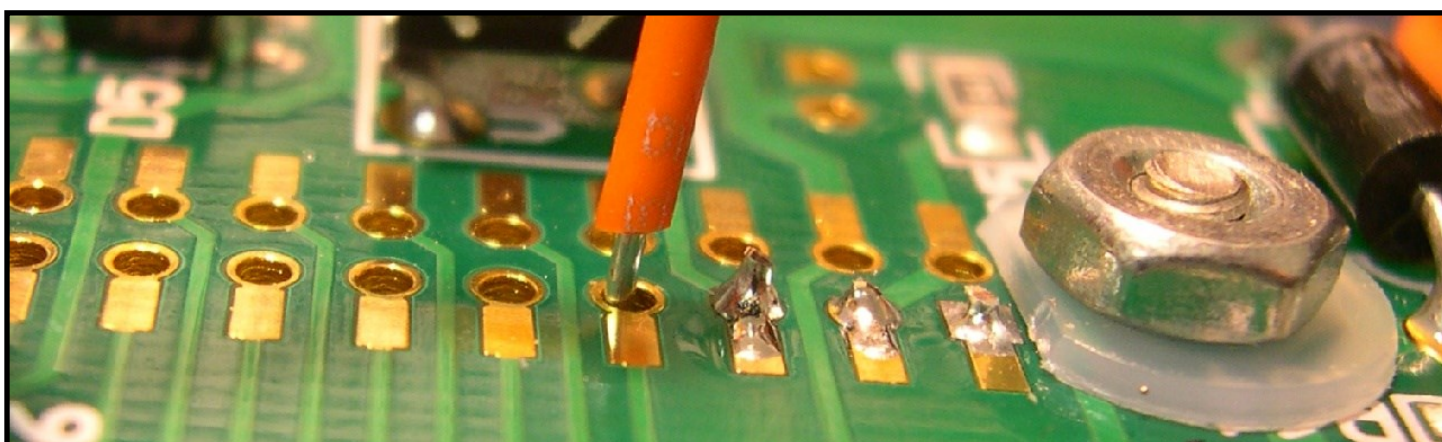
Final step in soldering the LCD display using 22g hook-up wire.
